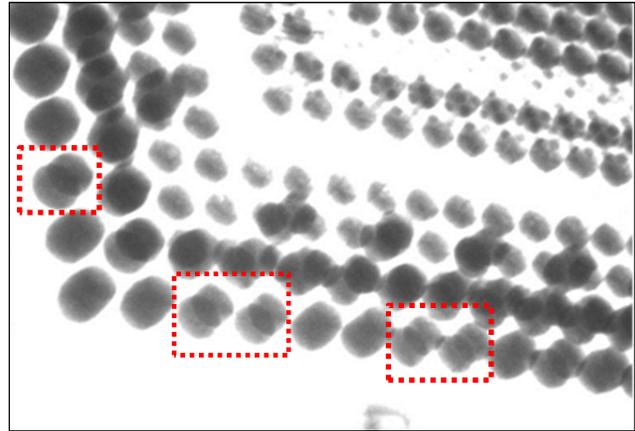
Representative Views of X-ray Inspection for the PoP Solder Joints
